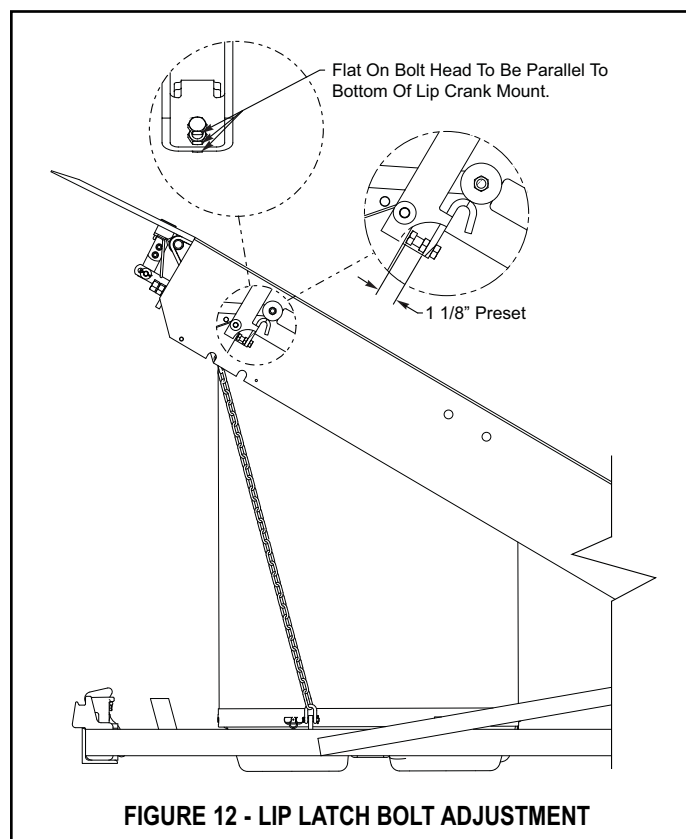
LIP LATCH BOLT ADJUSTMENT
